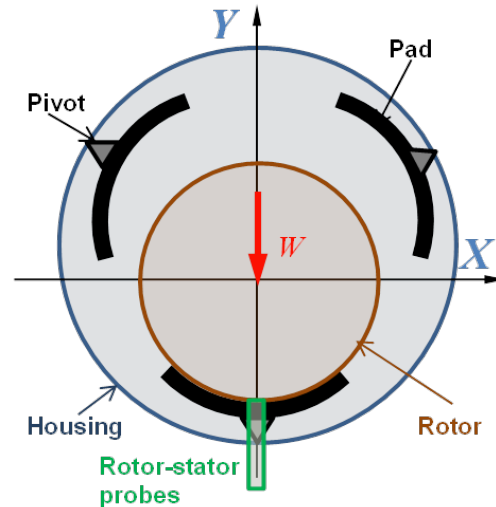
Illustration of three pad bearing and set up for measurement of pivot stiffness.
